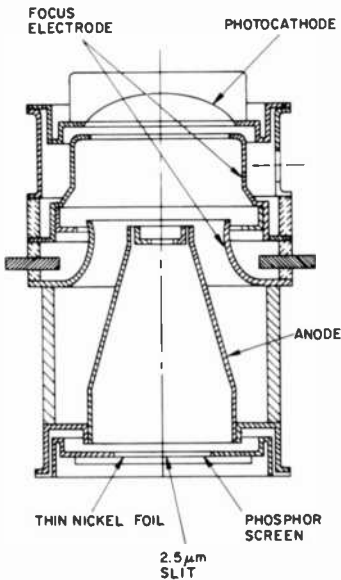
Cross-sectional view of the modified C21135 image tube.
